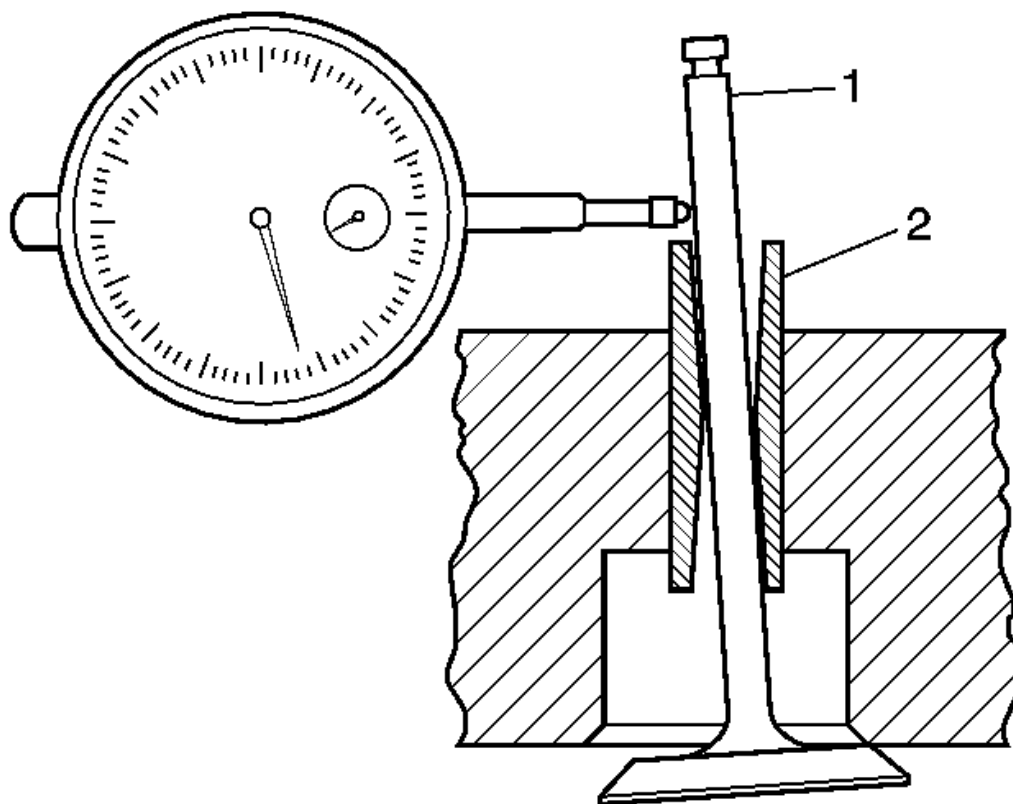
Inspecting For Excessive Valve Stem To Guide Clearance
